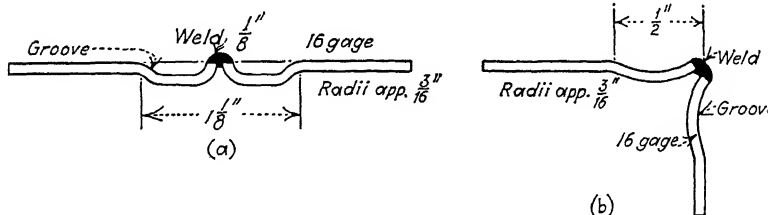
(a) Butt joint in aluminum sheet; (b) corner weld in aluminum.
